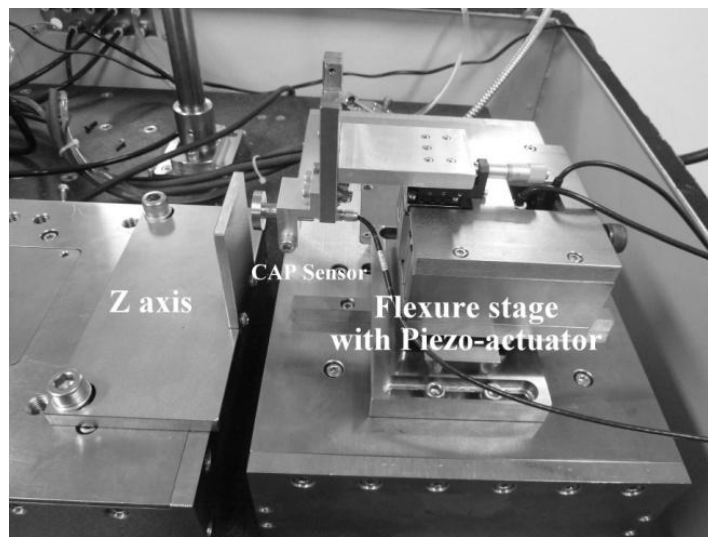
Developed single axis FiTS with CAP sensor assembly
